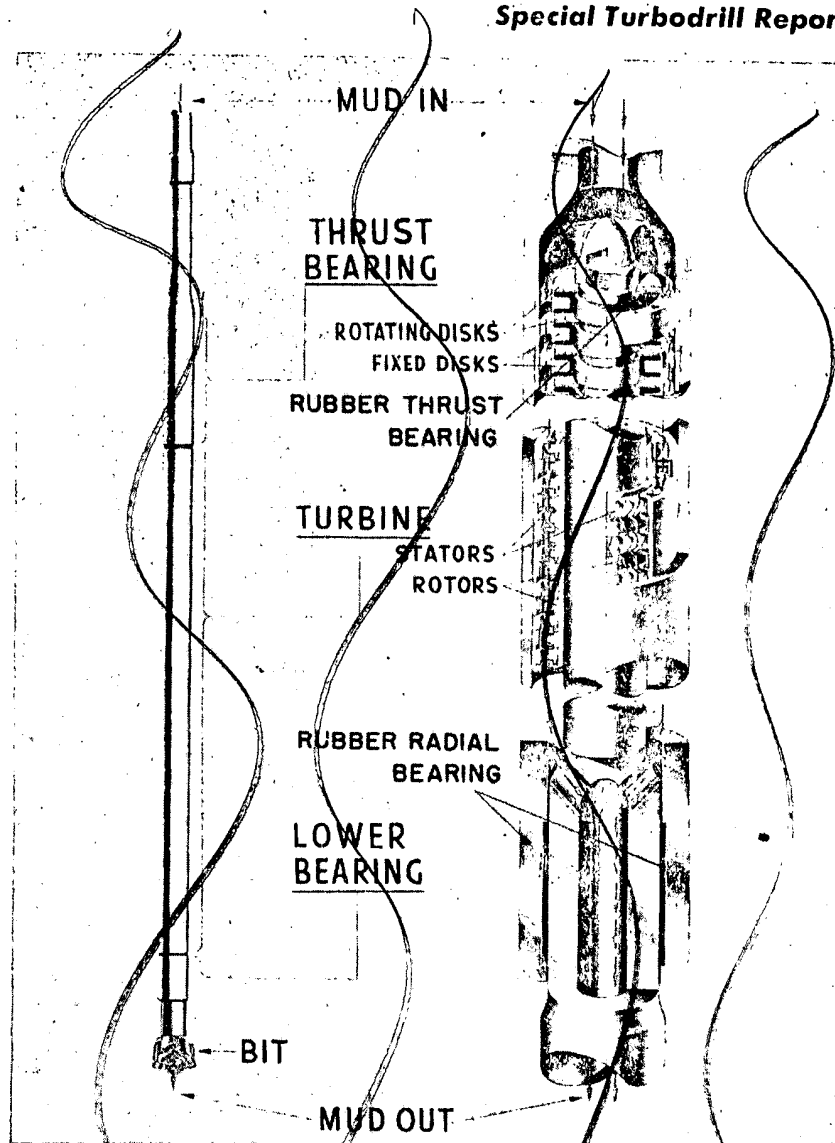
Cutaway drawing of turbodrill showing the important components and operational features.
